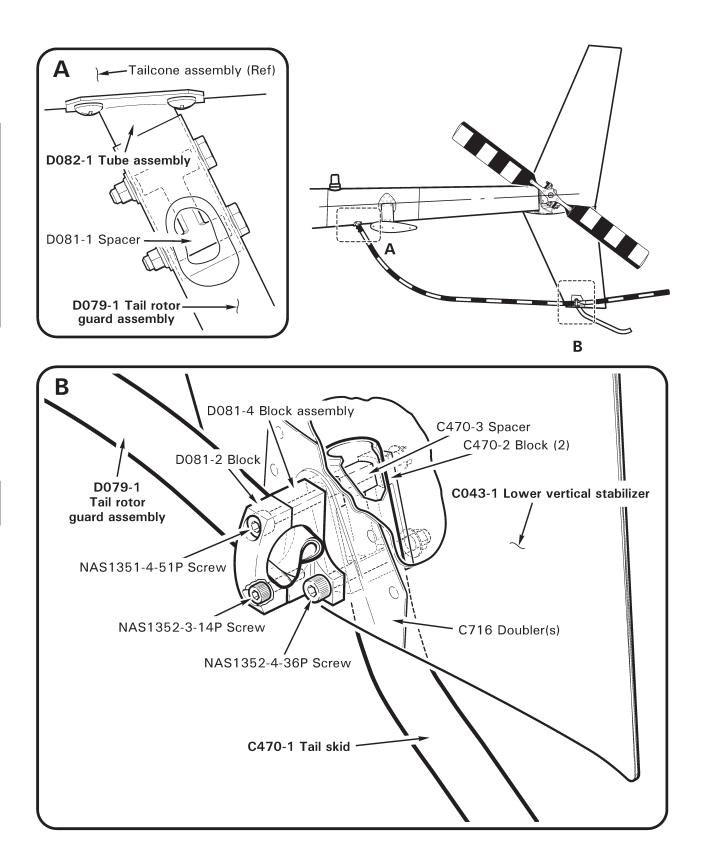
TAIL ROTOR GUARD ASSEMBLY (C050-2 float stabilizer assembly not shown)
